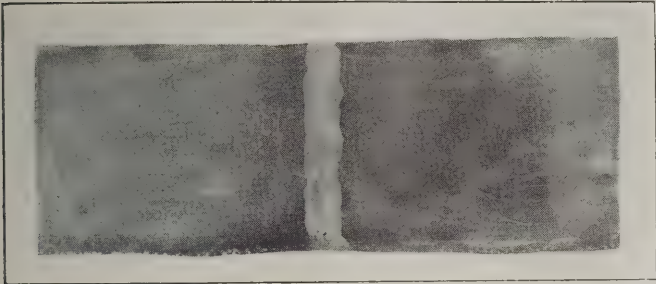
Photograph of Top Surface of Arc Weld After Burr Has Been Ground Flush and Whole Surface Buffed and Etched
